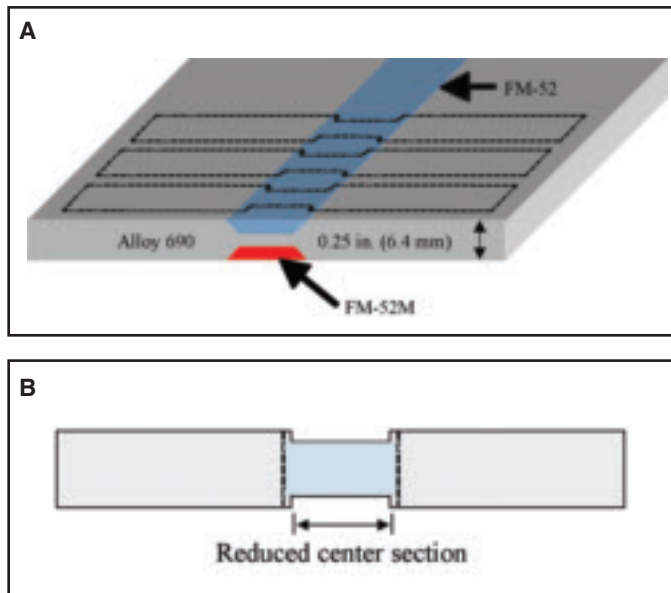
Sample preparation Method 1. A — Cross-sectional view of multipass welded plate with FM-52 and FM-52M filler metals. Strain-to-fracture sample blanks cut from the plate (dashed lines); B — face of the STF sample blank with reduced center section. The cross-hatched area indicates the location of the deposited weld metal with FM-52 on one side and the FM-52M on the other.
